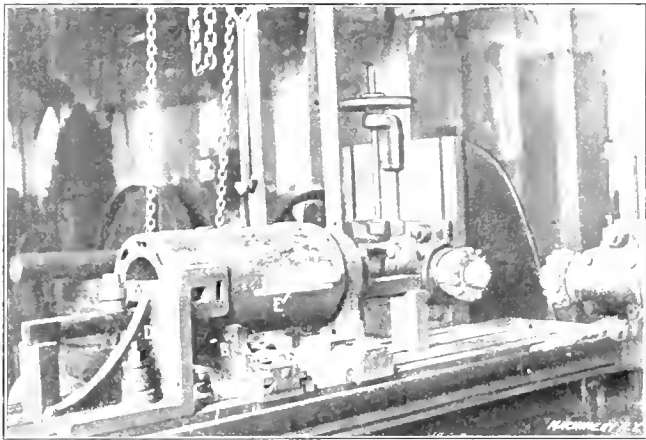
Milling Bottom and Side of Cylinder Ways on Double-head Milling Machine
